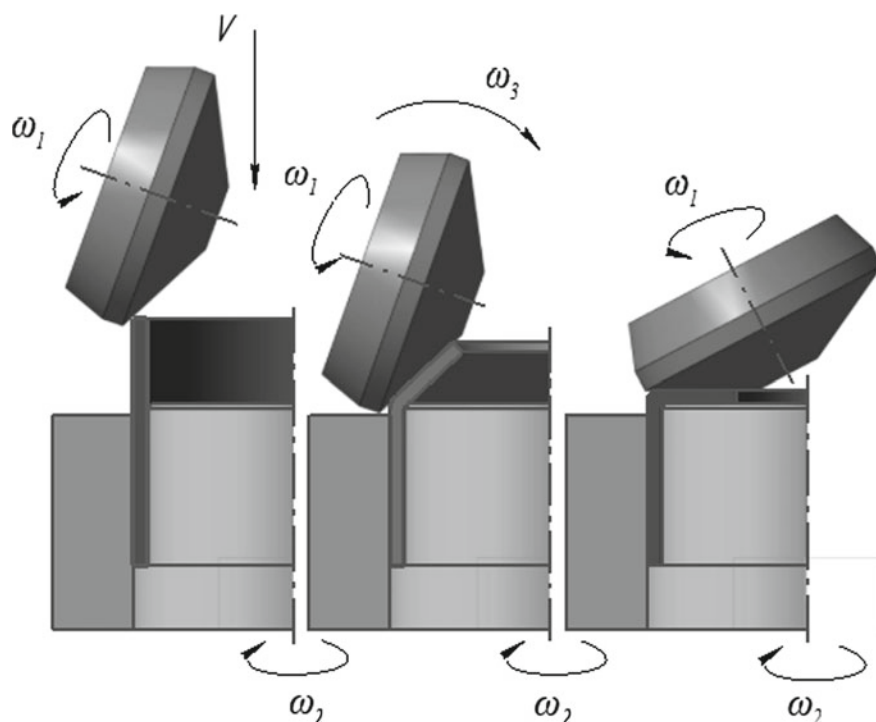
The scheme of motion of the conical forming roll when rotary forging the inner flanges: ω_1 —axial angular velocity of rotation of the forming roll; ω_2 —angular velocity of rotation of the workpiece; ω_3 —angular velocity of inclination of the roll; V —the speed of translational motion of the forming roll
